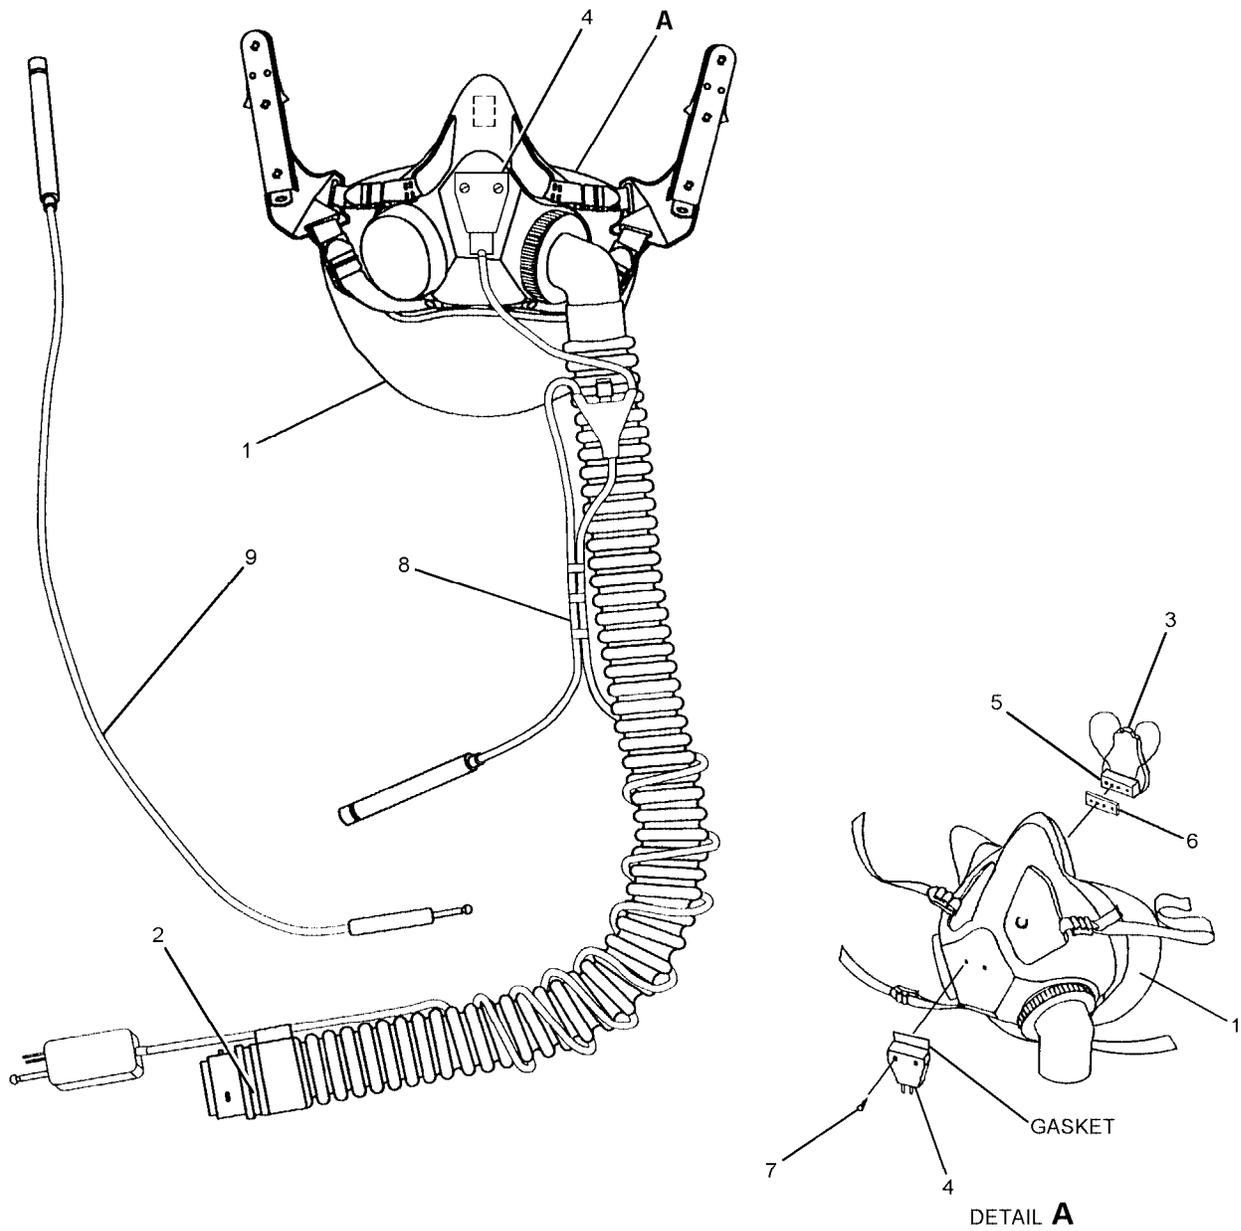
MBU-23(V)3/P Oxygen Mask Assembly Components
